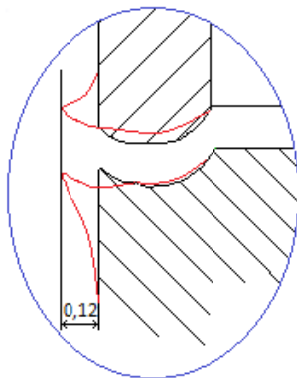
Magnified appearance of worn tools (marked in red) after 1000 pieces
